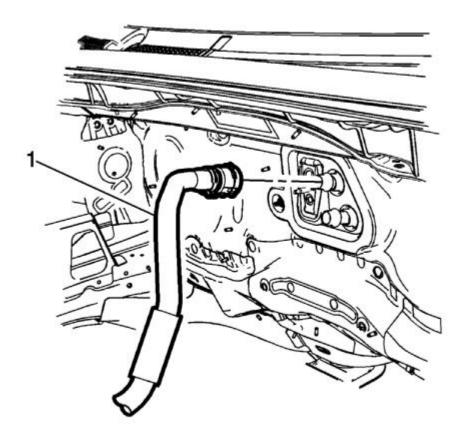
Heater Outlet Hose Courtesy of GENERAL MOTORS COMPANY
